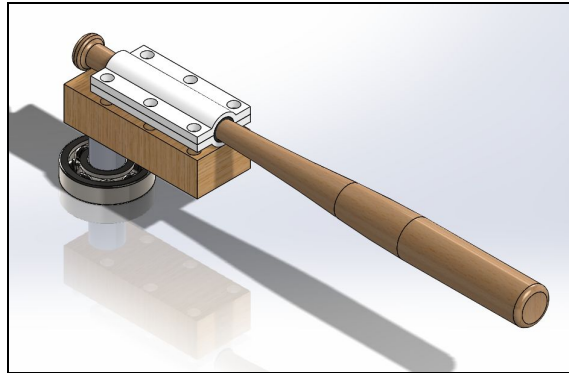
Ball Bearing Incorporated into Shaft for Horizontal Movement
